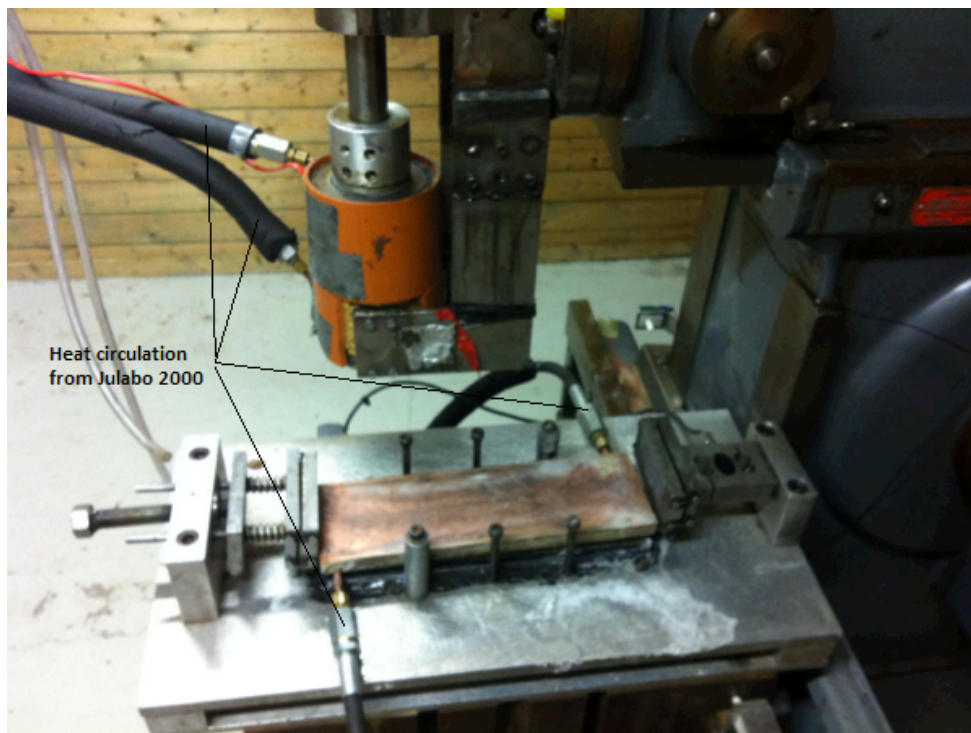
Copper plate and ice specimen holder with connections to the heating circulator
